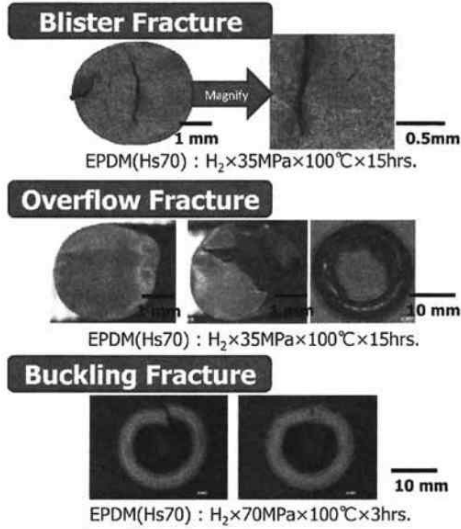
fracture mode of EPDM O-ring by high-pressure hydrogen gas
